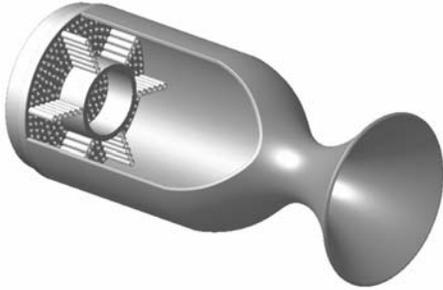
A combustion chamber of a liquid rocket engine with baffled injectors
